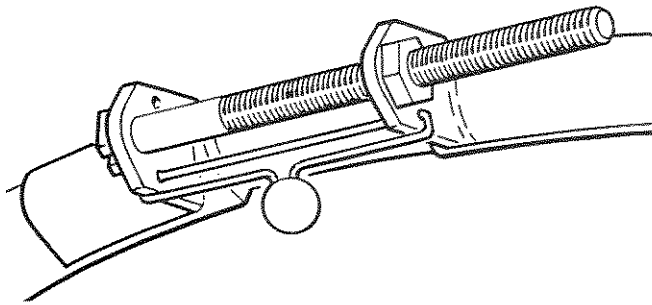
Wire Seal for Drum-Type Containers with Nondrilled-Head Closure Bolts
